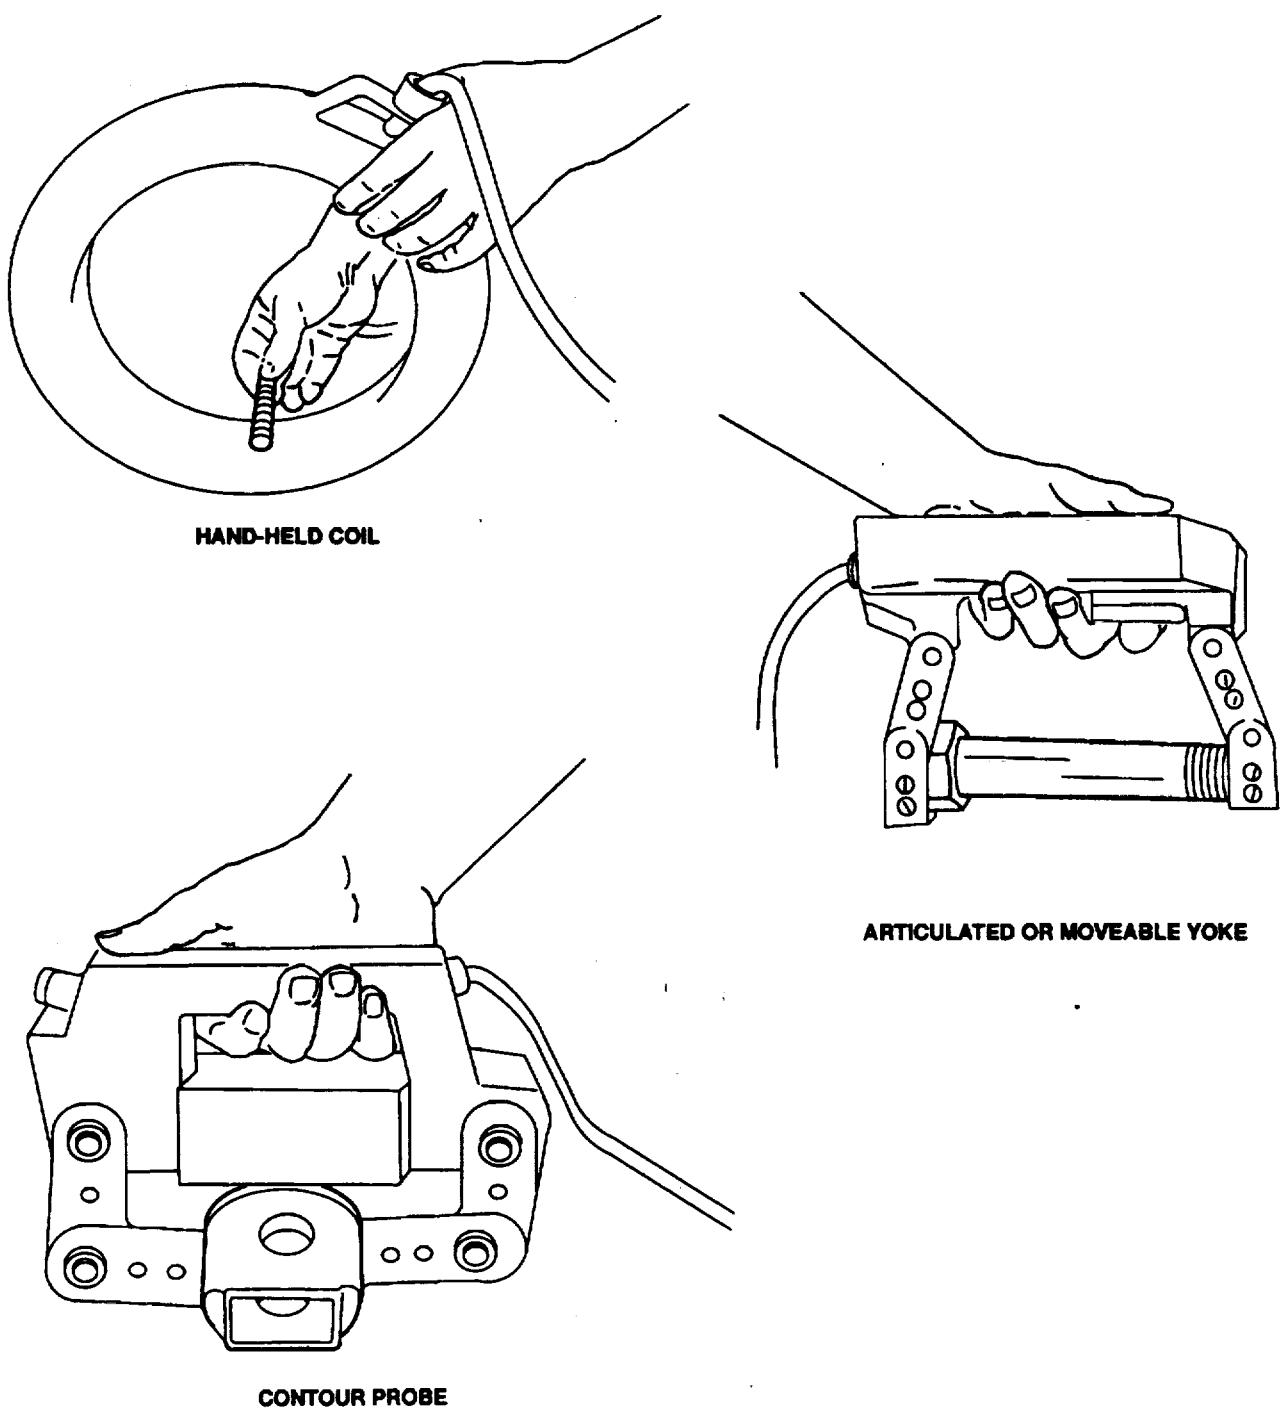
Portable Magnetic Particle Inspection Equipment
